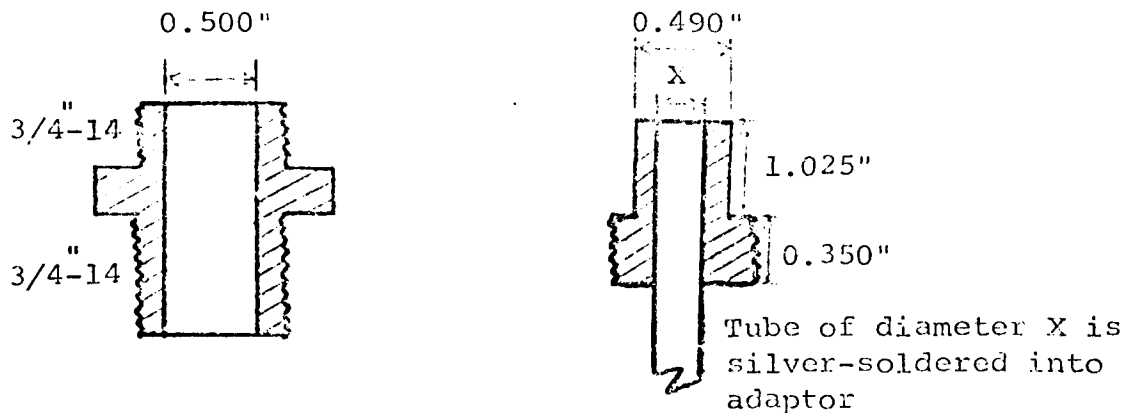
Adaptors for Slit and Tube Mounting - Full Size
